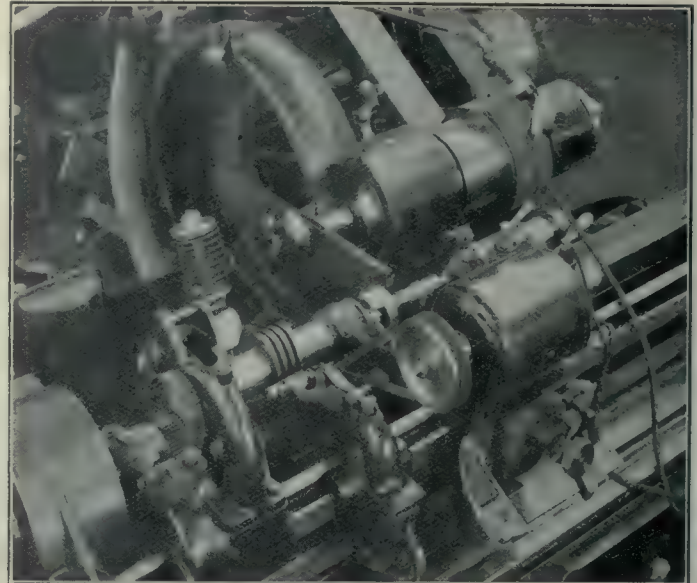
Grinder Arranged for Grinding Master Cams.
